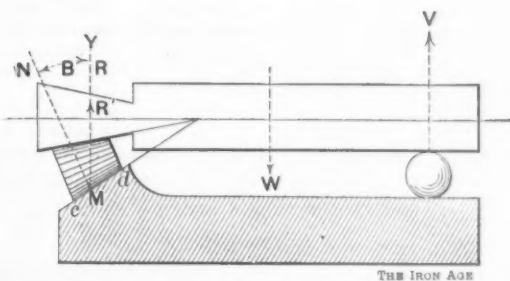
Shaft Supported by Conical Rollers and Balls.
